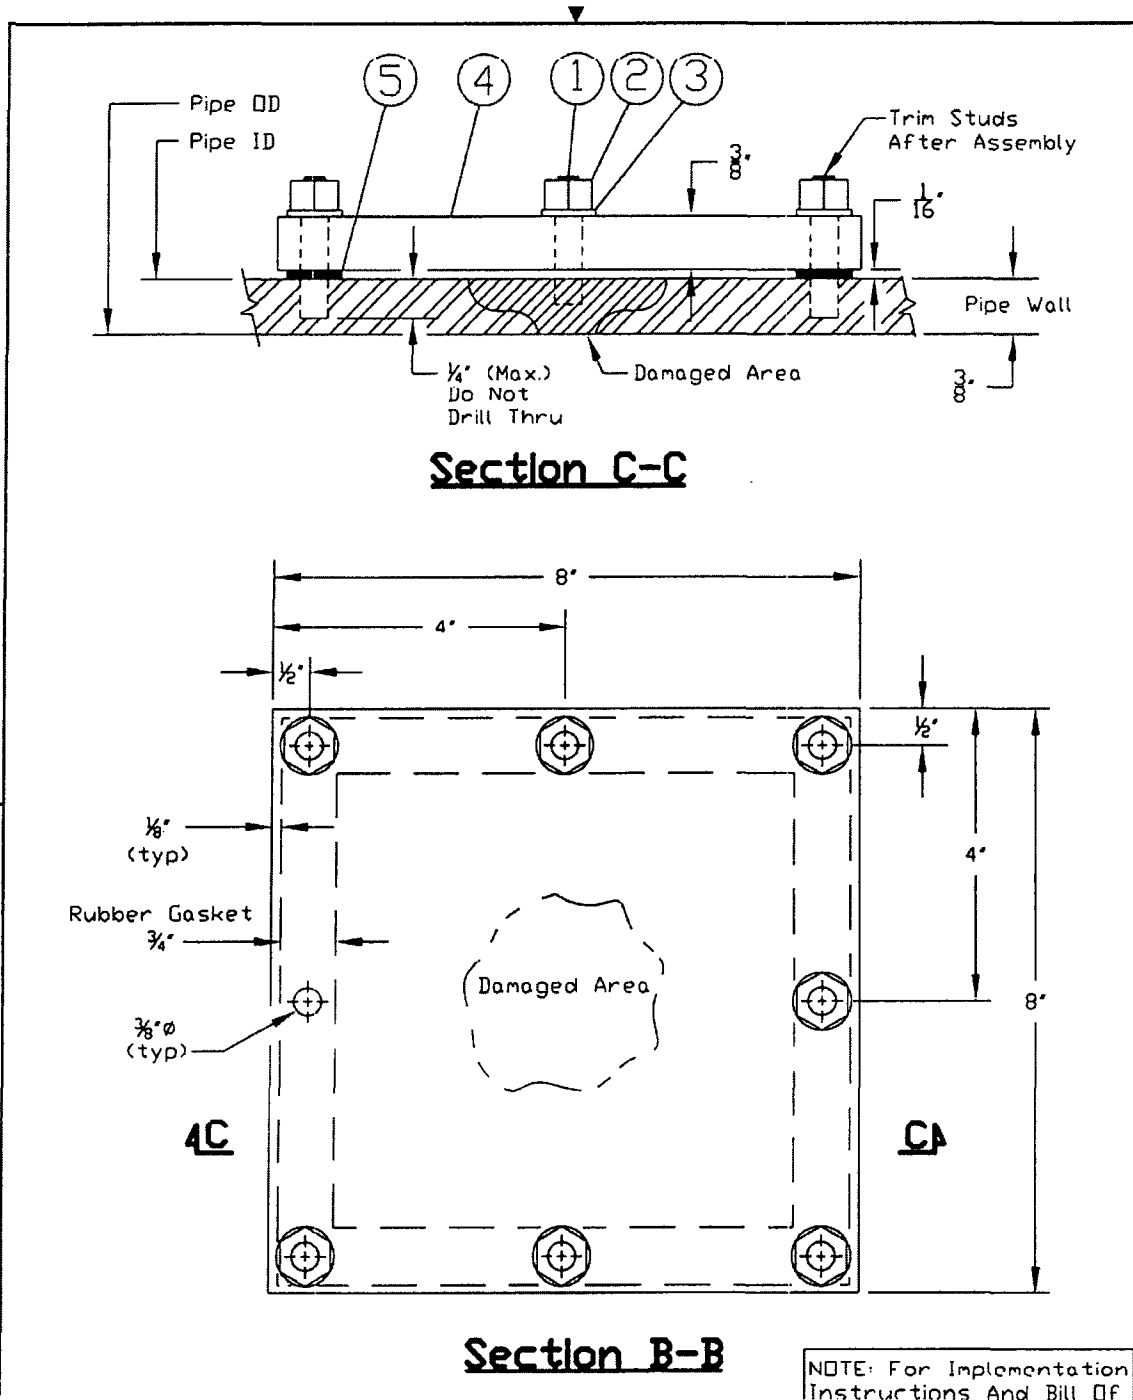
Typical Bolted Patch Plate Drawing Section B-B View
